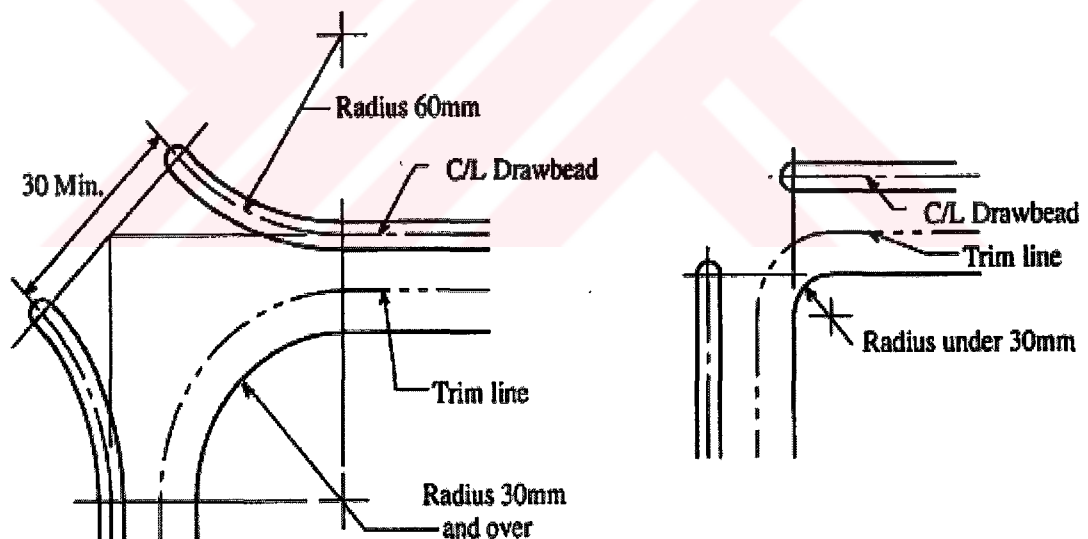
Position of Drawbeads: Trim Line on Blankholder
